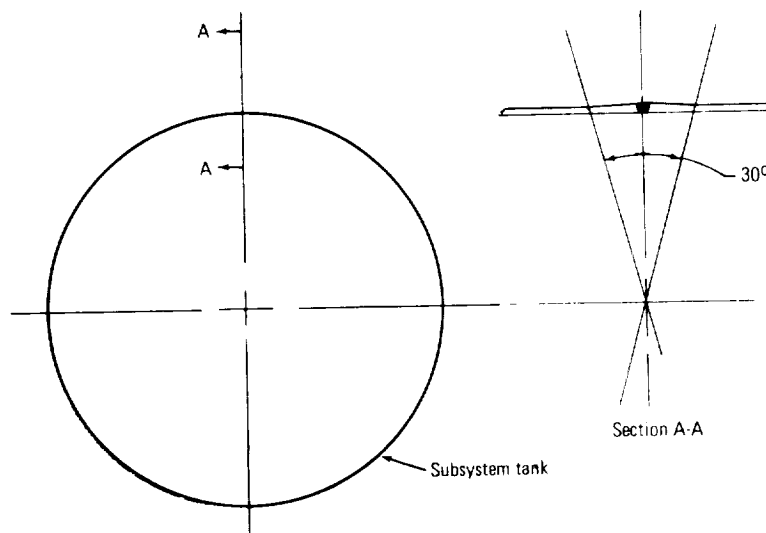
Sketch of geometry of a weld joint for a subsystem tank.
